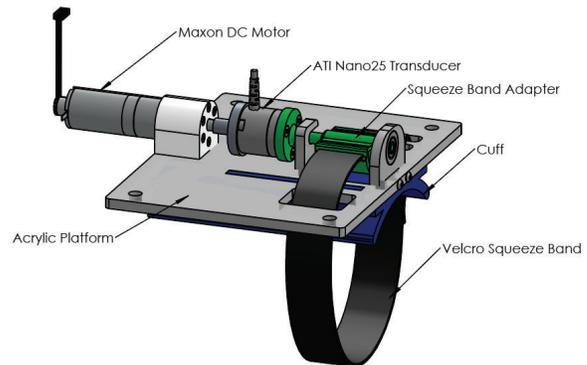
Isometric view of bottom of squeeze cue module. The module is compatible with both the lower and upper tiers of the testbed.
